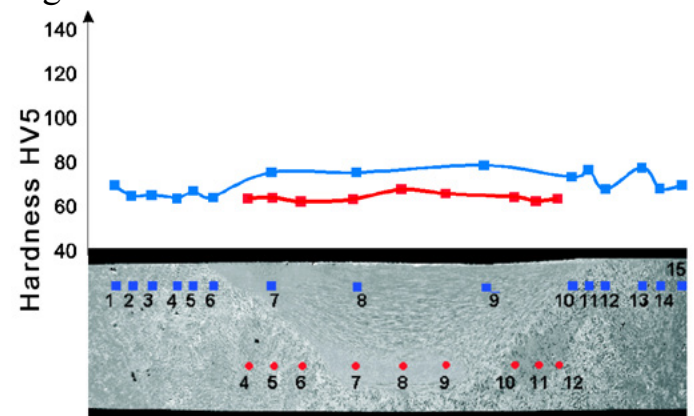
Structure of the weld and hardness in sections of friction stir welded joint made of alloy EN AC-43200. Welding parameters:  $V_n = 500$  rev./min,  $V_z = 200$  mm/min
